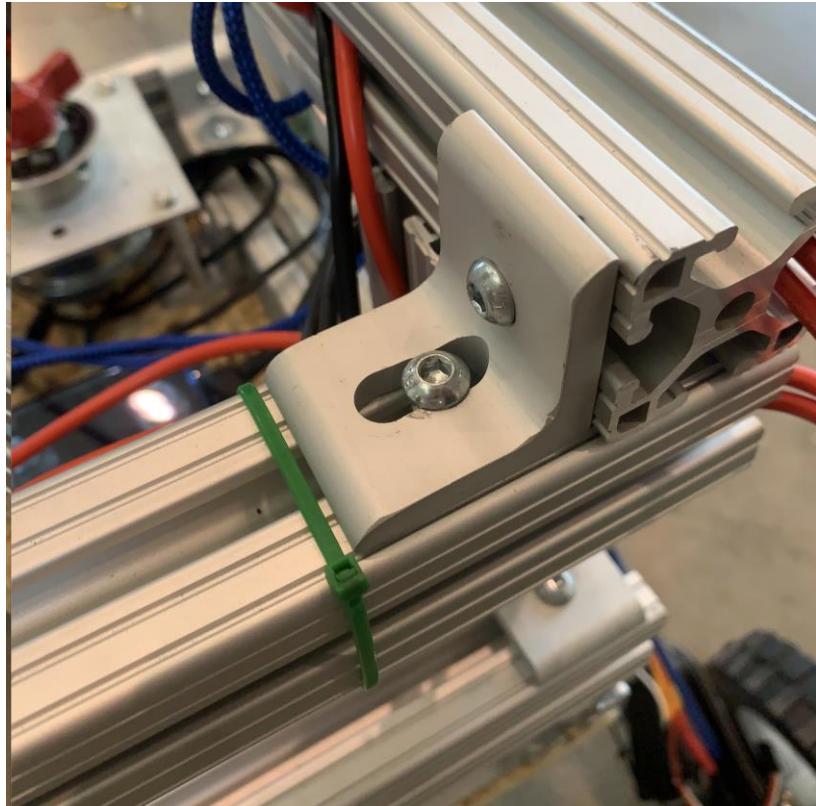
Picture of improper fitting chassis extrusion bracket bolts.
